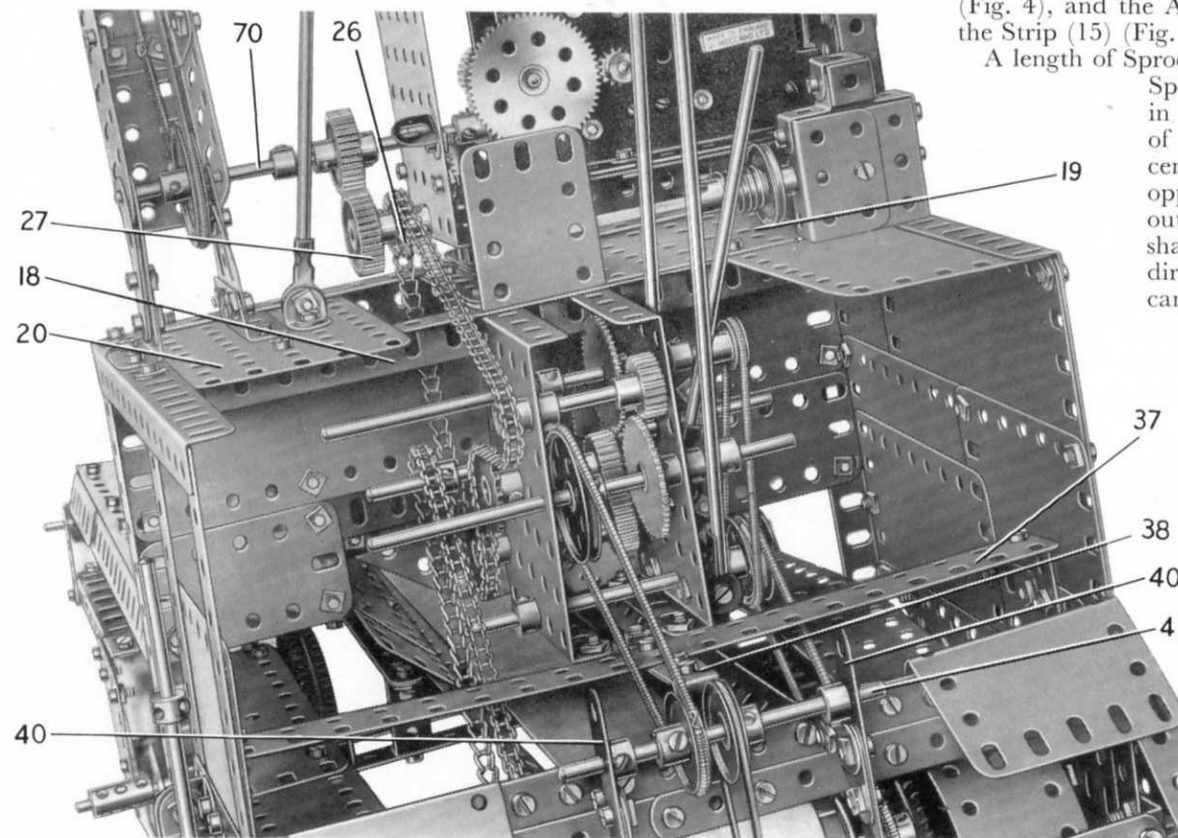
A close-up, showing driving arrangements from the Electric Motor and gear-box
